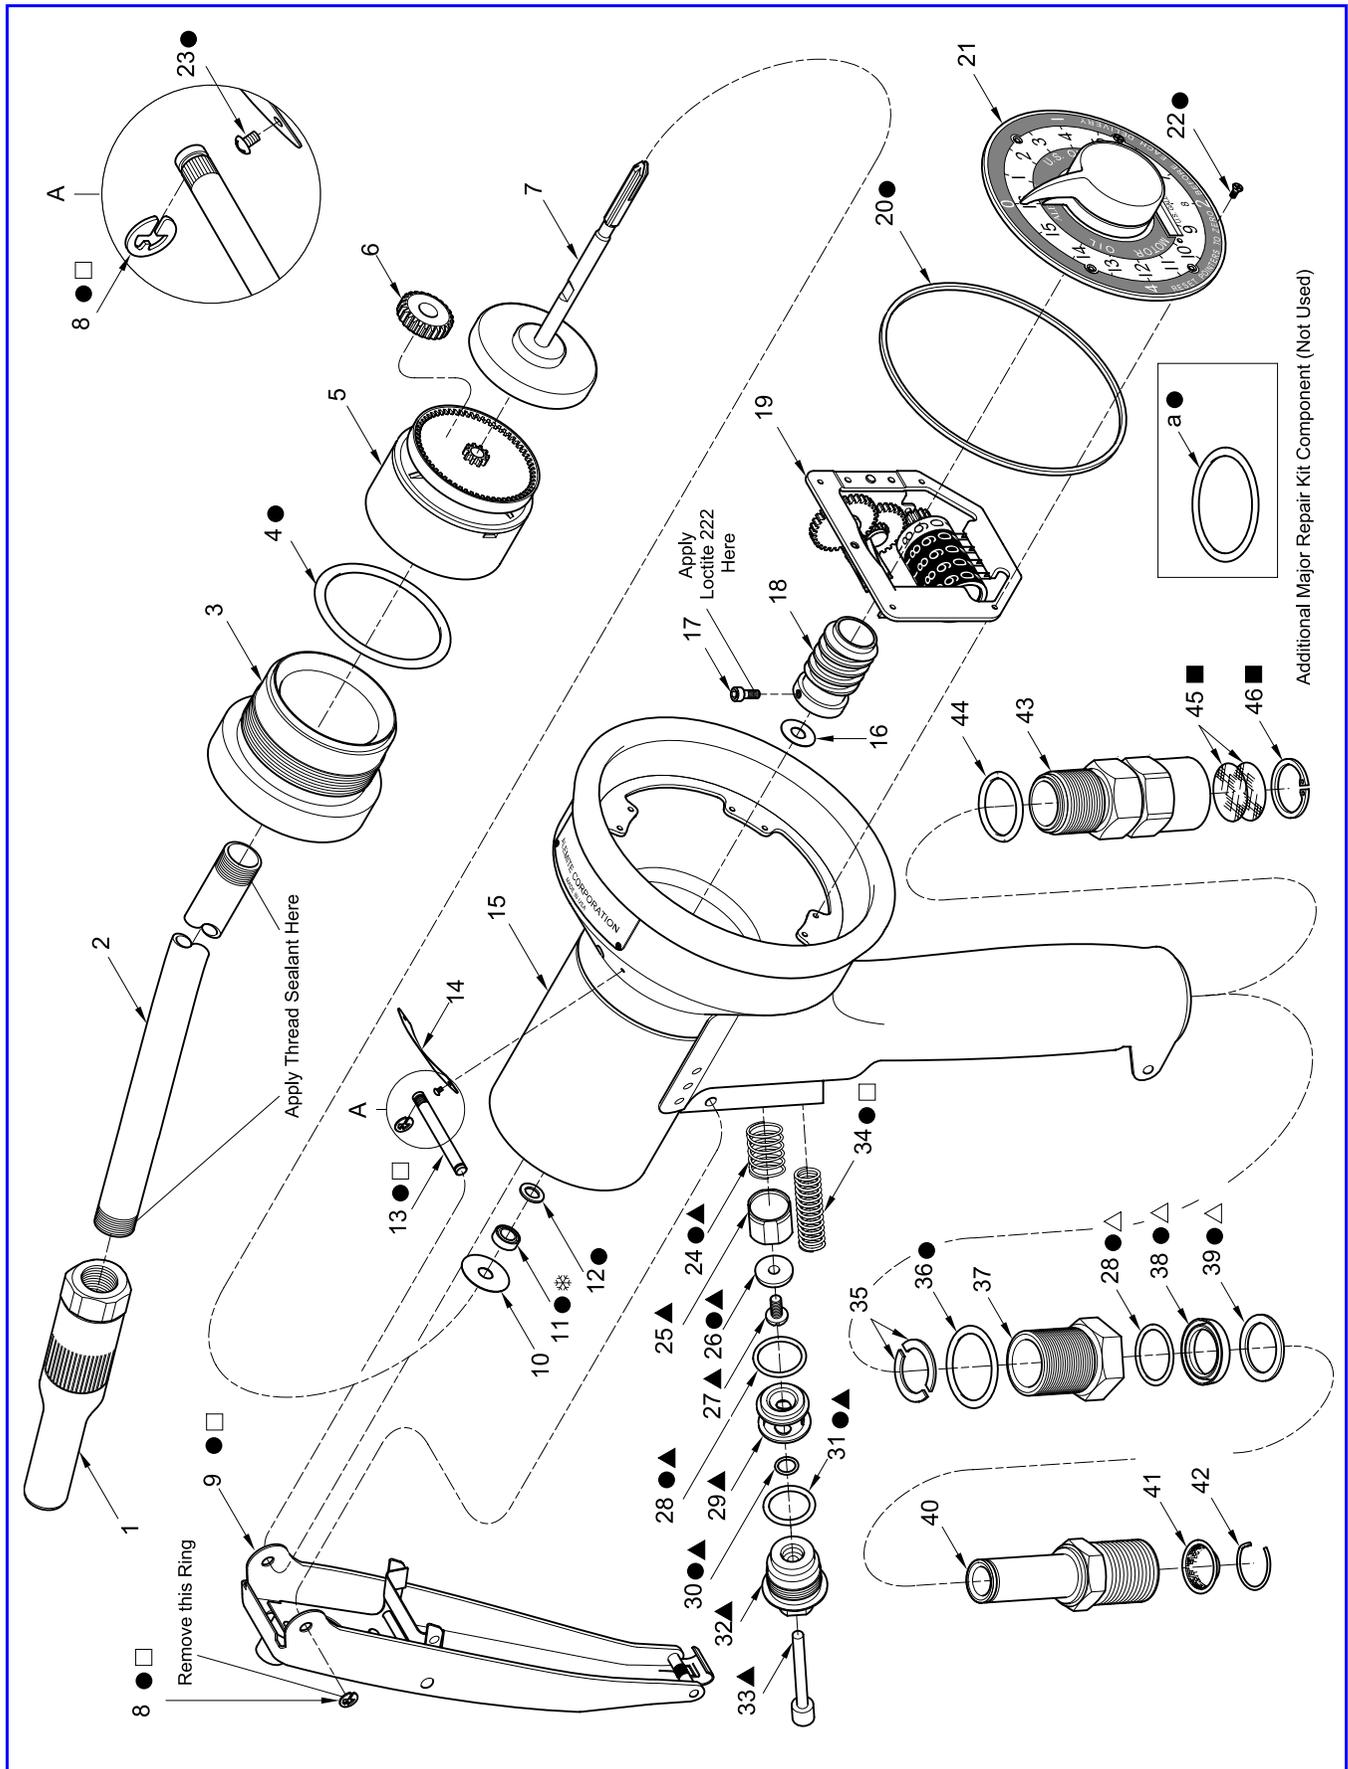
A Mechanical-Metered Control Valve Models 3685-1 and 3685-D1 - Exploded View
